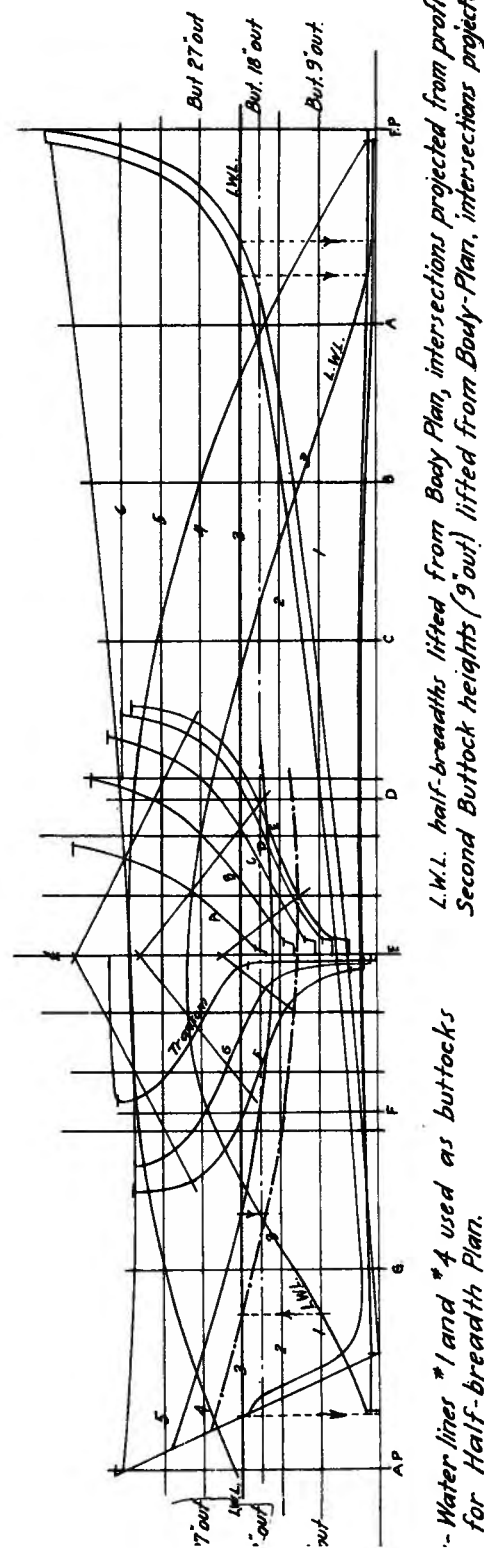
Lofting a 17-foot Hampden Boat. Sixth stage—fairing first water line and second buttock.
